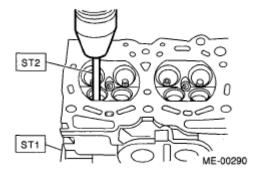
Inserting ST2 Into Valve Guide Using Valve Guide Remover ST2 (499767200) Courtesy of SUBARU OF AMERICA, INC.
